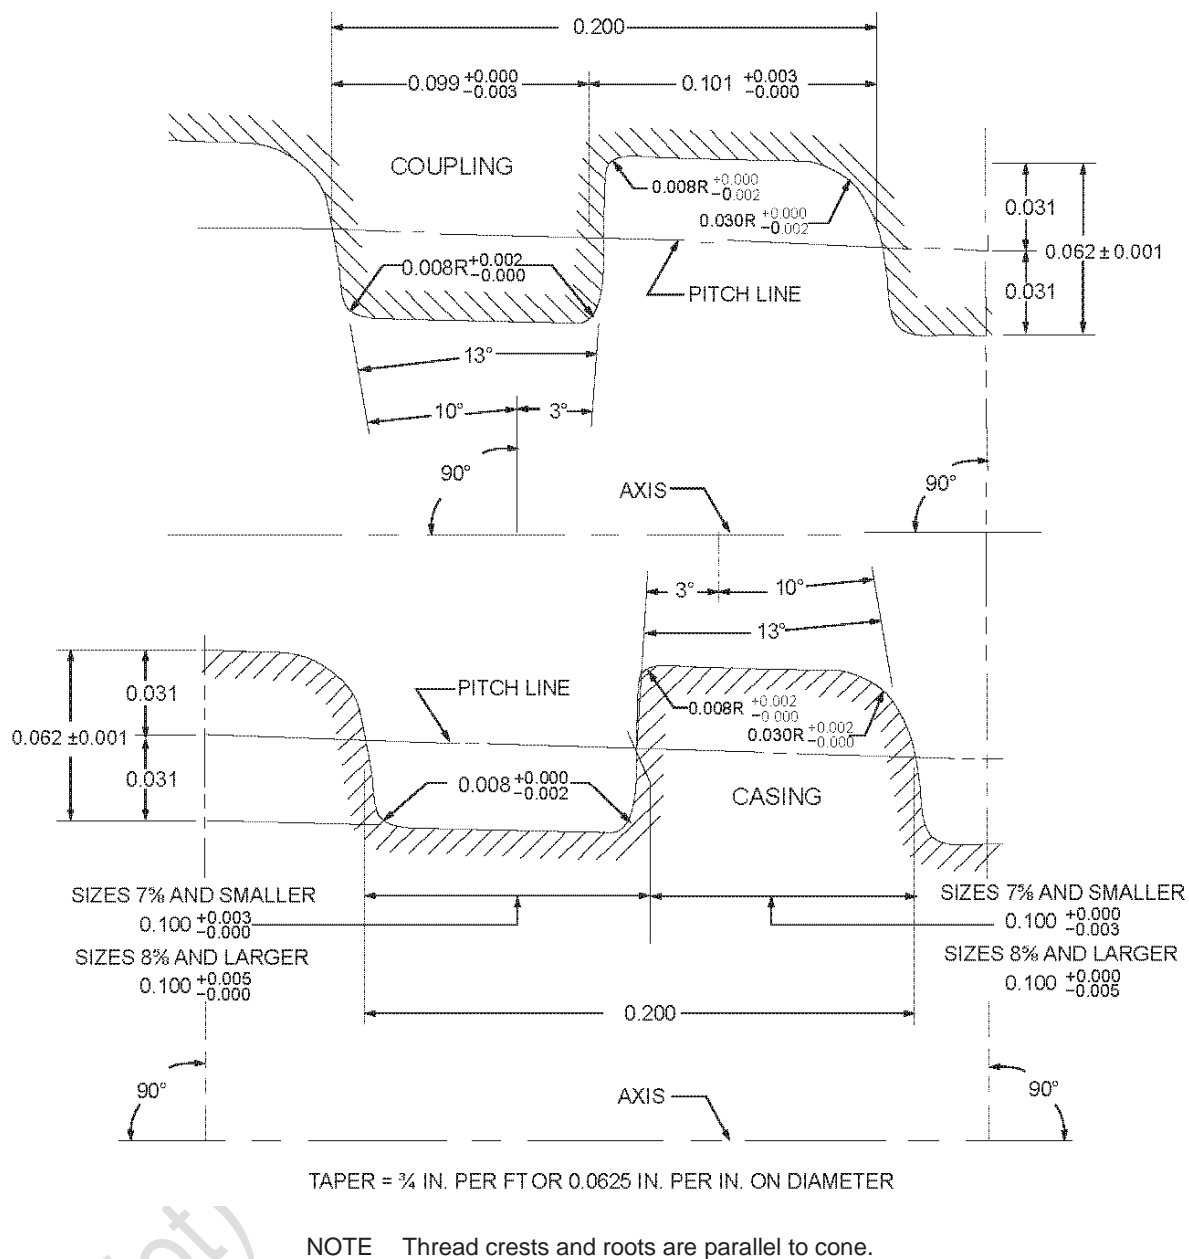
Buttress Casing Thread Form and Dimensions (Casing sizes 4 1/2 through 13 3/8 in.)
